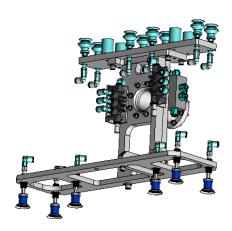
An illustration of the Side Plate/Mid-Beam Robot end of arm tooling.
